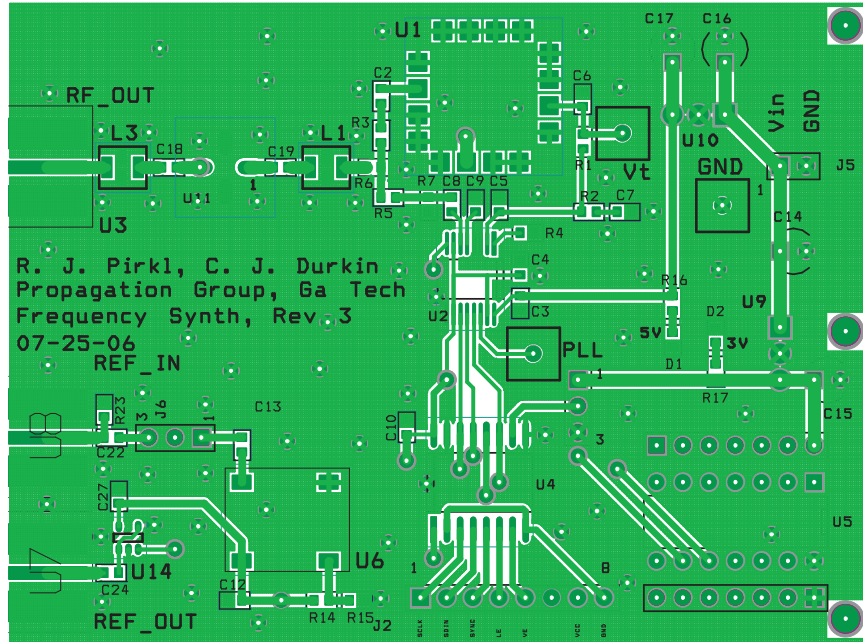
The frequency synthesizer board's top copper layer, solder mask, and silk screen.
